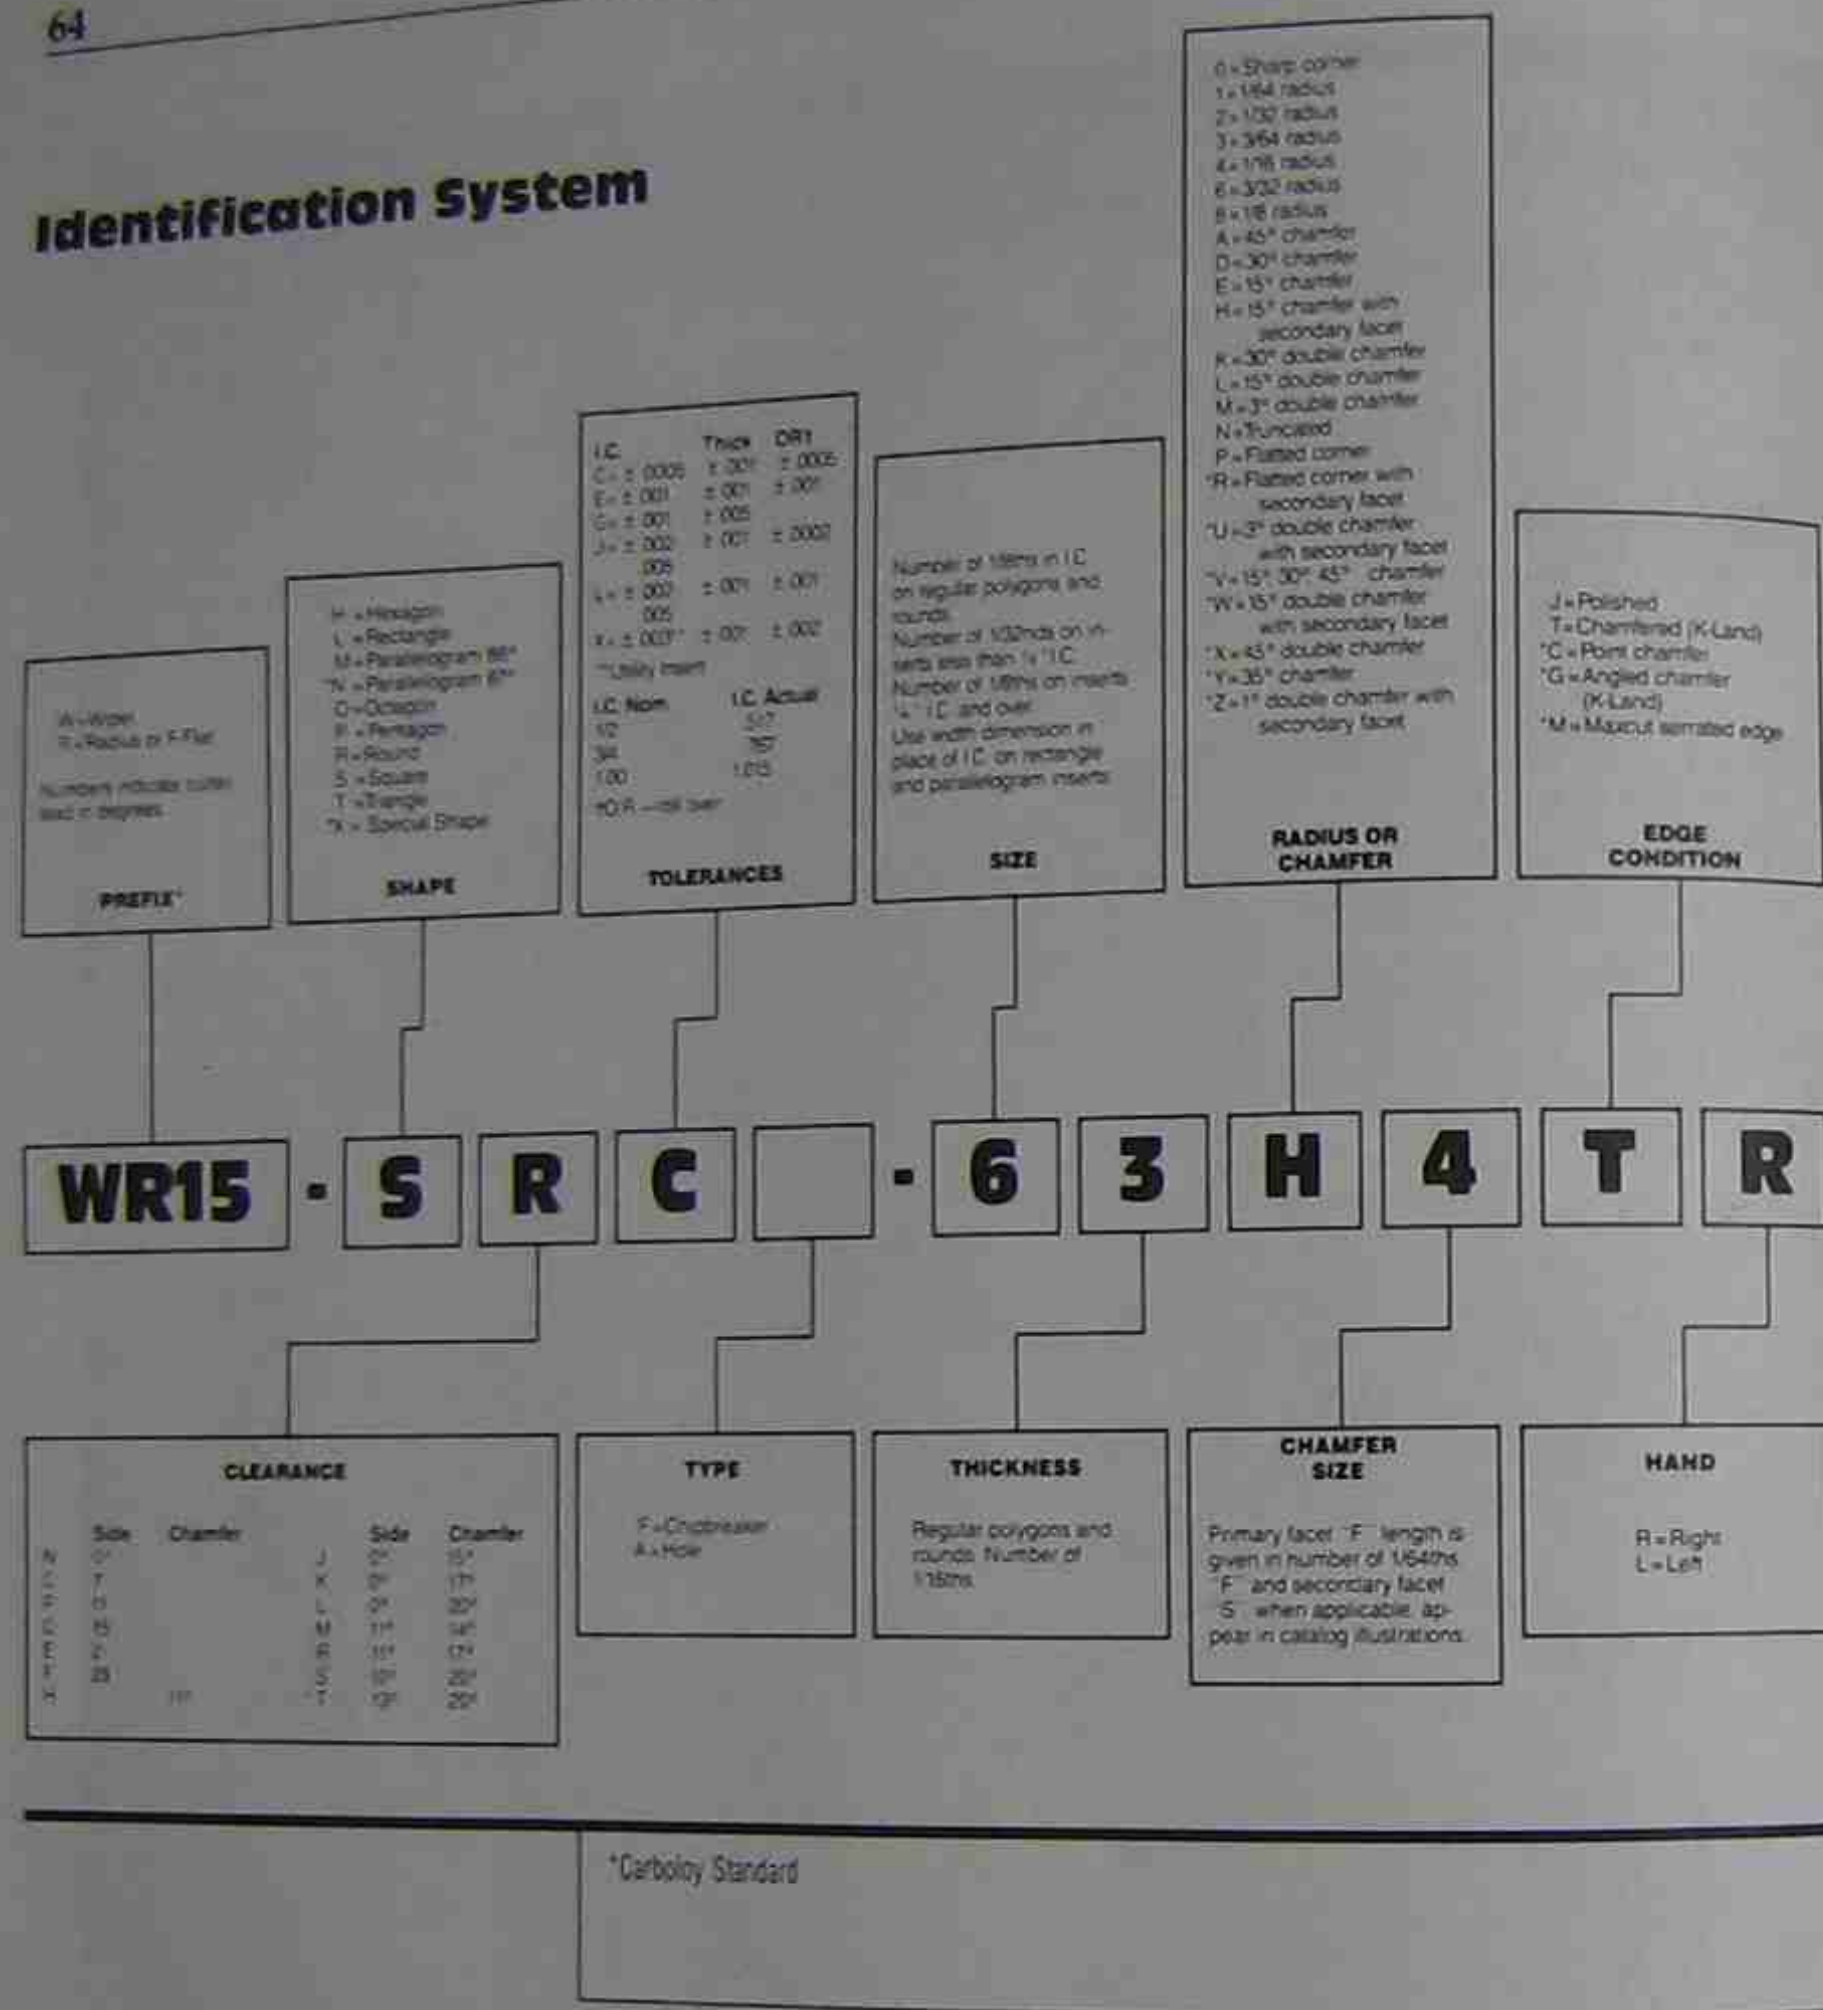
Carbide insert identification system (Courtesy of Carboloy Inc., A Seco Tools Company)
